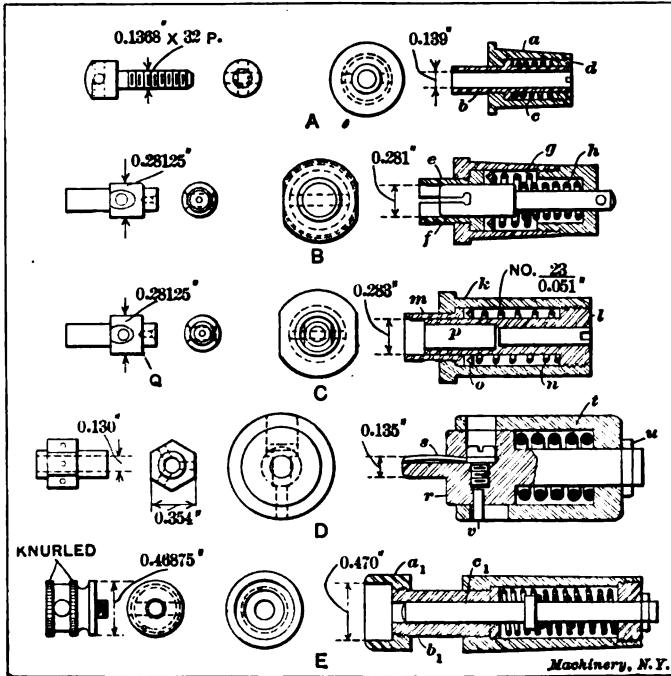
Representative Types of Transferring Bushings and the Work they were designed to hold
